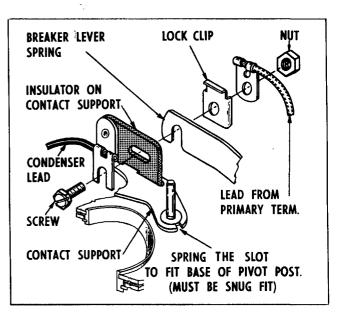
Correct Assembly of Breaker Lever and Spring
